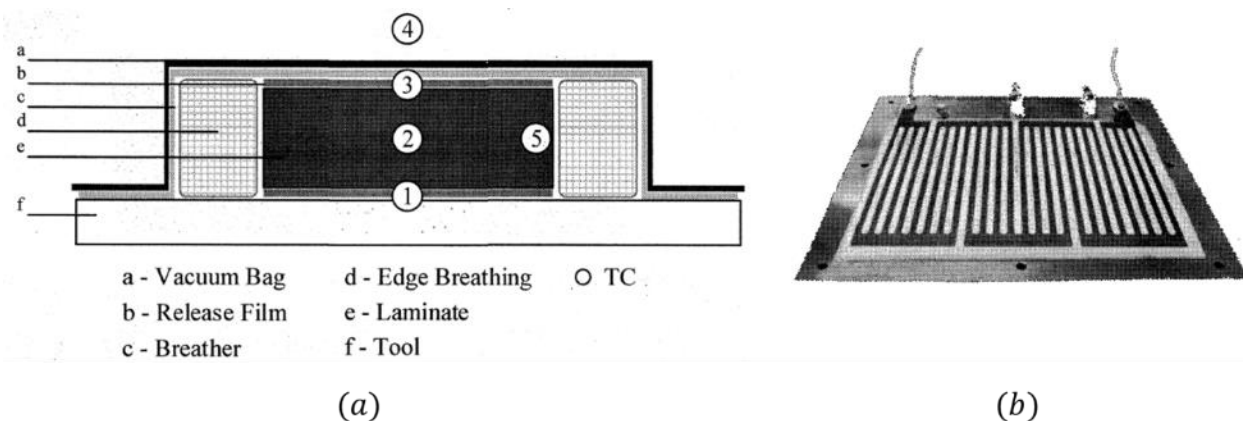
Experimental setup of heated tool with TCX heaters: (a) bagging configuration; (b) the underside of the tool plate [16].
